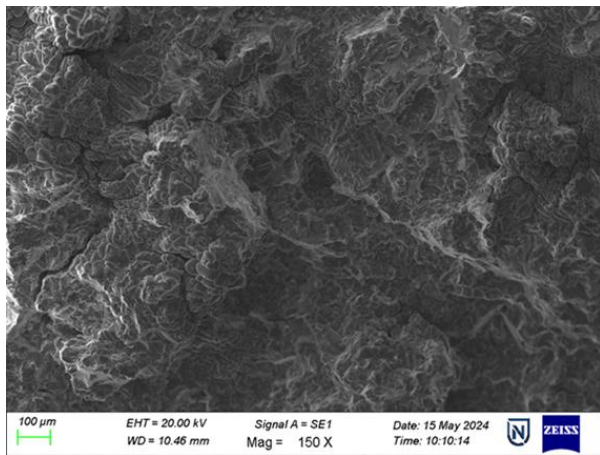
a Fractured surface of Al7075-0% SiC specimen
